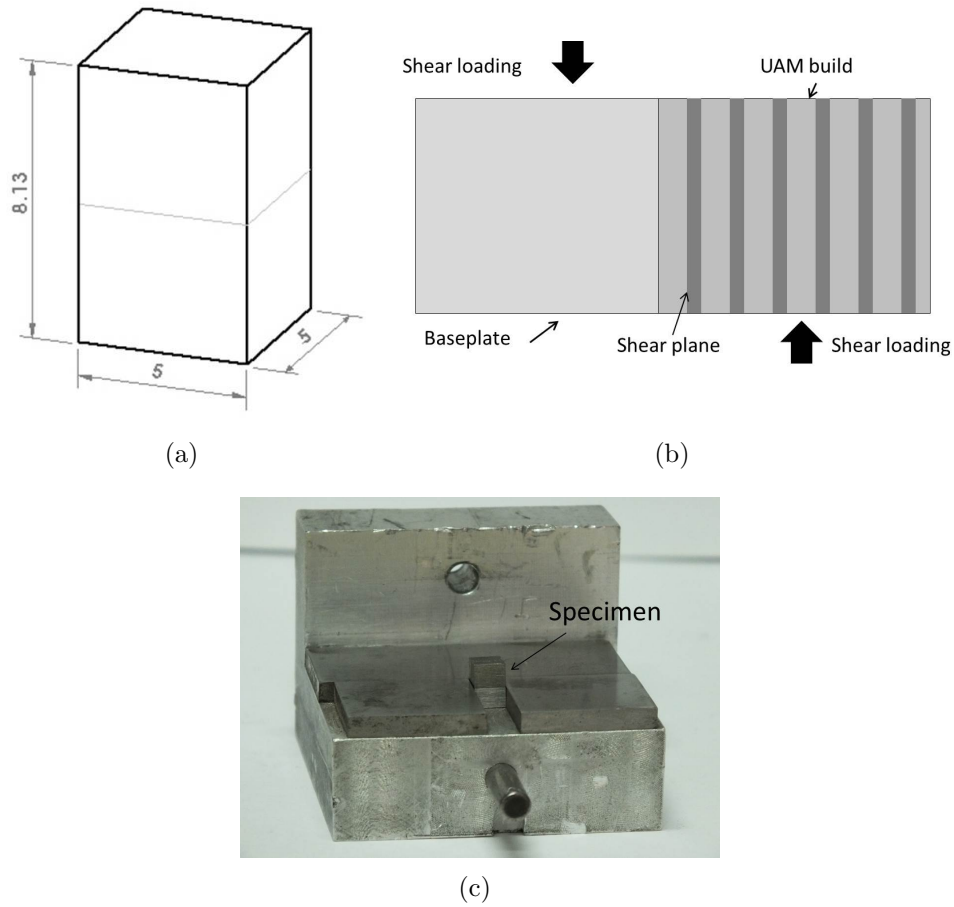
Setup for shear test including (a) shear specimen drawing (in mm) (b) schematic of shear test loading conditions (not to scale) and (c) image of shear fixture.
